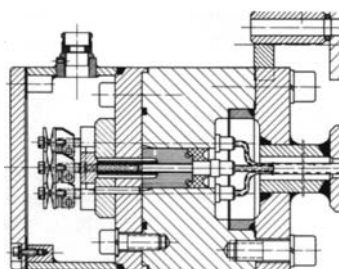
Terminal box in explosion-proofed and high-pressure specification.
